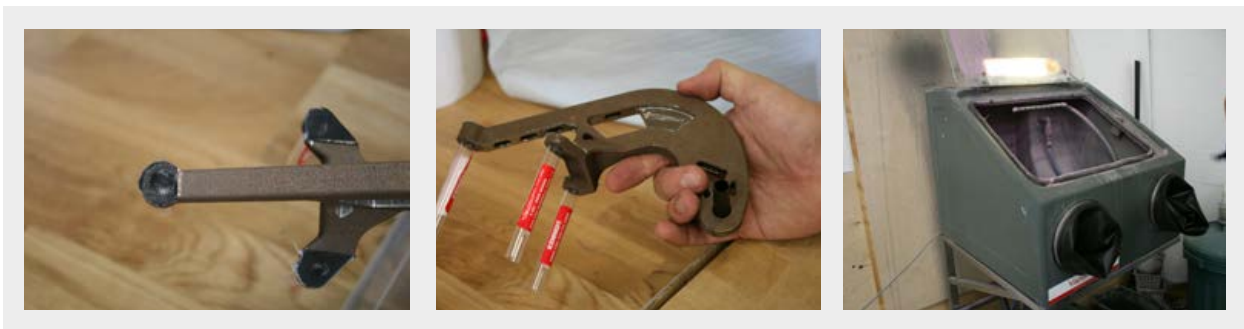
Vapour blasting to produce a uniform surface finish. Machined surfaces and holes are masked to protect them
